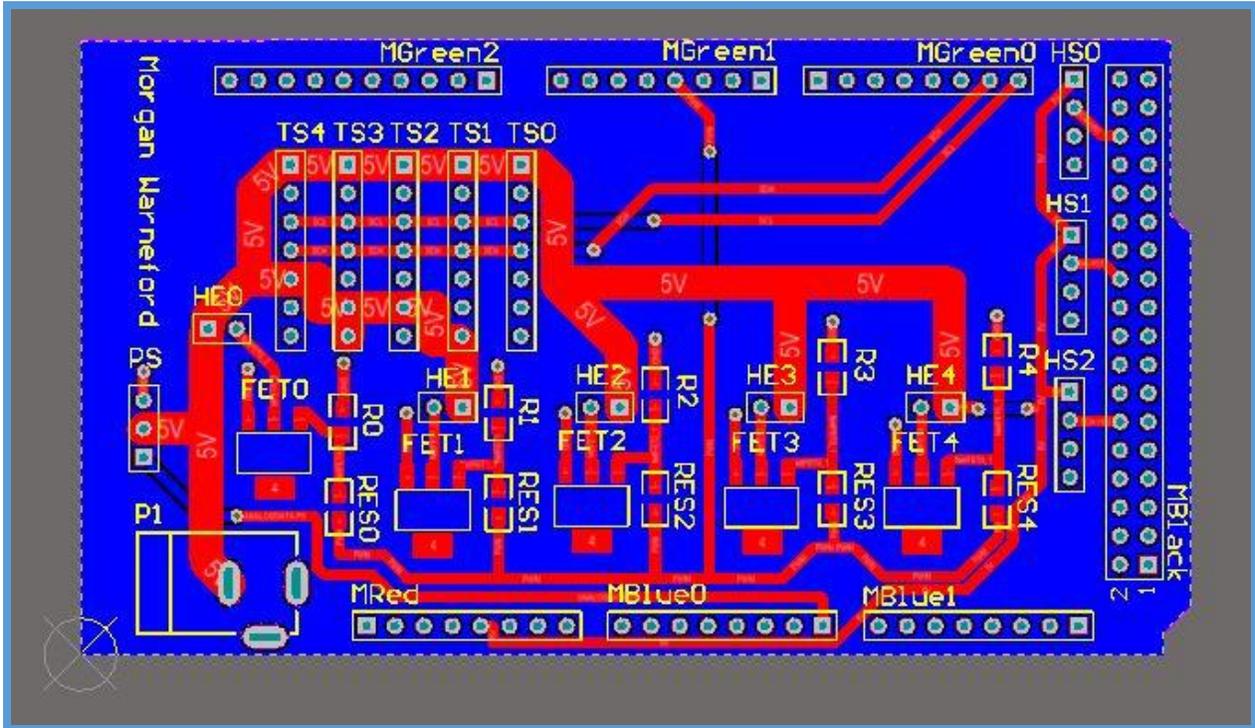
Two dimensional PCB design, where the red tracks indicate the tracks of copper on the top layer of the board, and the blue tracks indicate the tracks of copper on the bottom layer of the board. The yellow text is part of the overlay.
